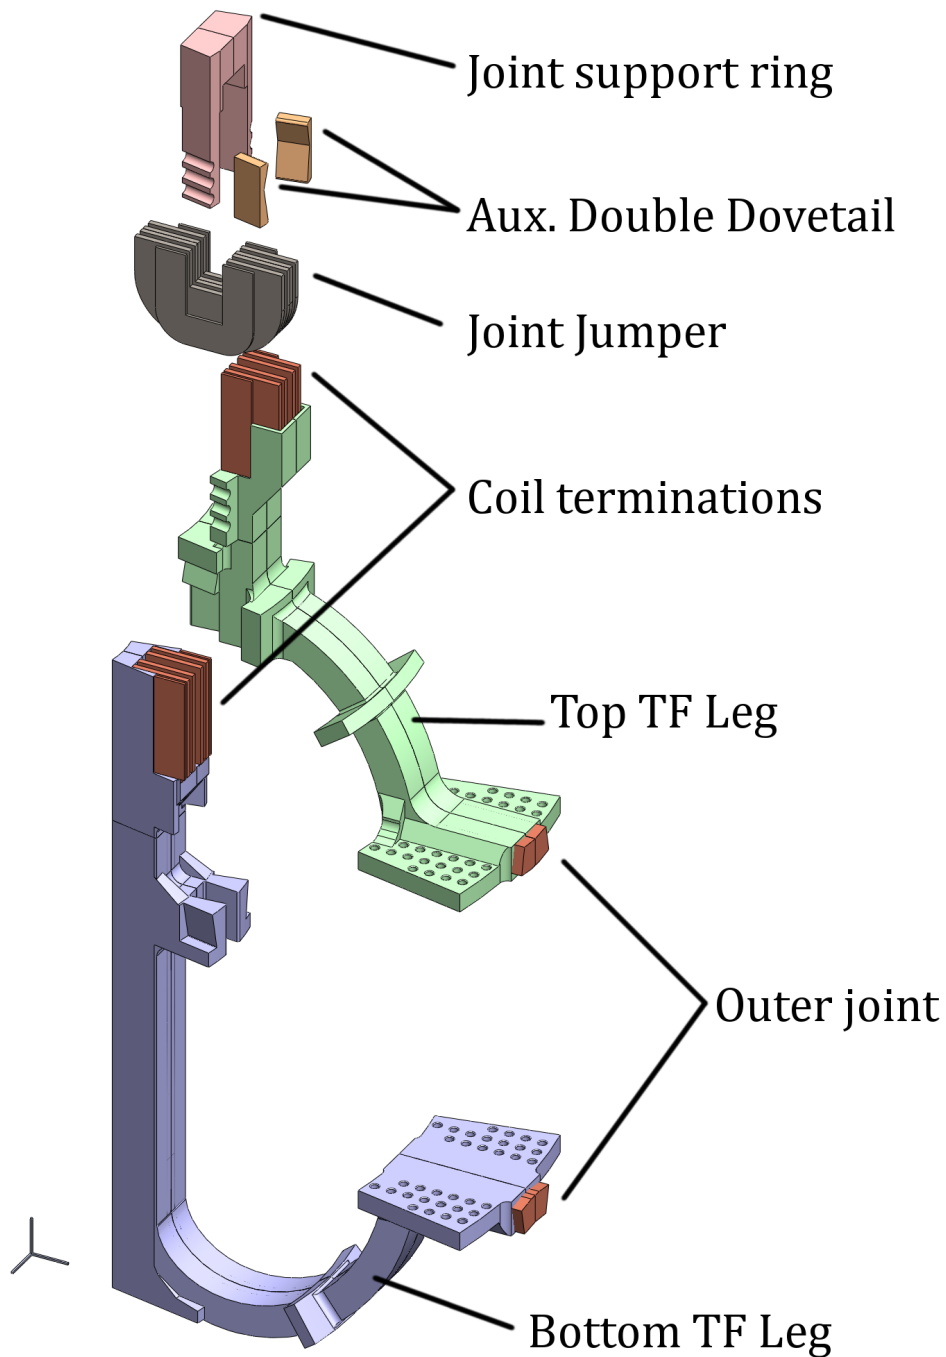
Final conceptual design of the TF coils, exploded view. A 22.5° section is shown, corresponding to a single coil, with its parts named. The outer electrical joint and the bolts are not shown for clarity. The number of coil terminations and jumpers are larger than shown in this illustration, but for clarity it was limited to six. The scale in the bottom left is 1 m in each direction.
